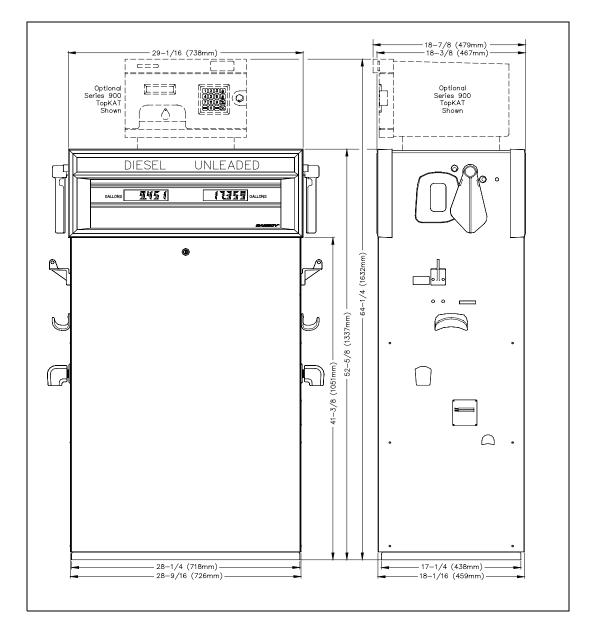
Series 9800A Twin Pump/Remote Dispenser Dimensions
